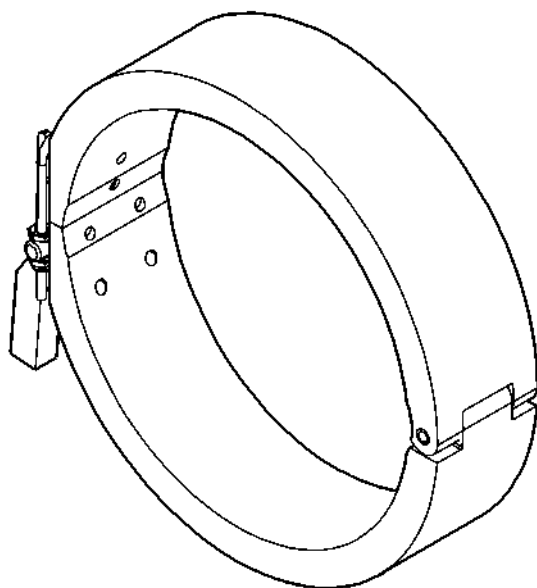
Flywheel Housing Alignment Tool,J 42734
